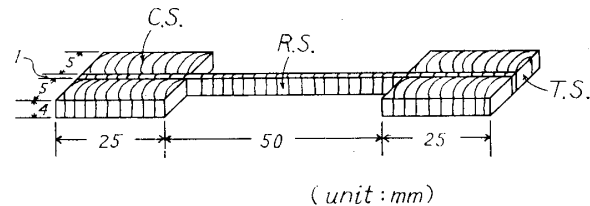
Shape and dimensions of test specimen. C.S. : Cross section, R.S. : Radial section, T.S. : Tangential section
